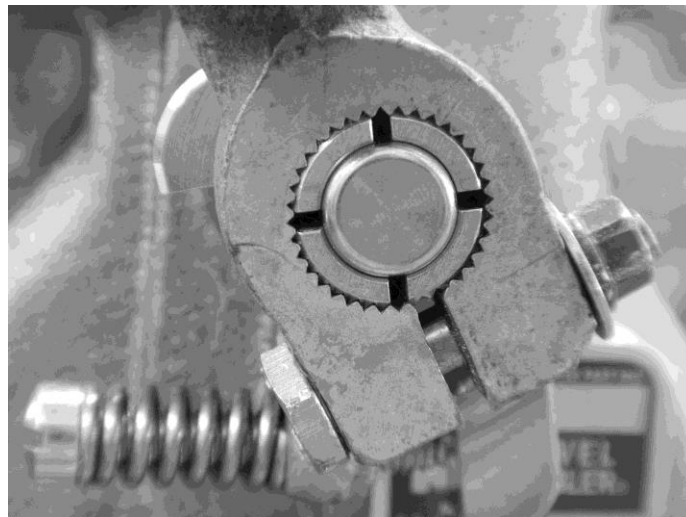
Proper installation of Throttle Arm to the Serrated Shaft
